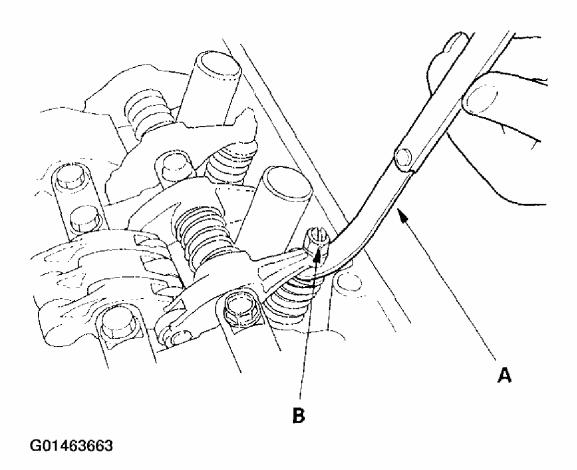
Inserting The Feeler Gauge Between The Adjusting Screw & The End Of The Valve Stem
